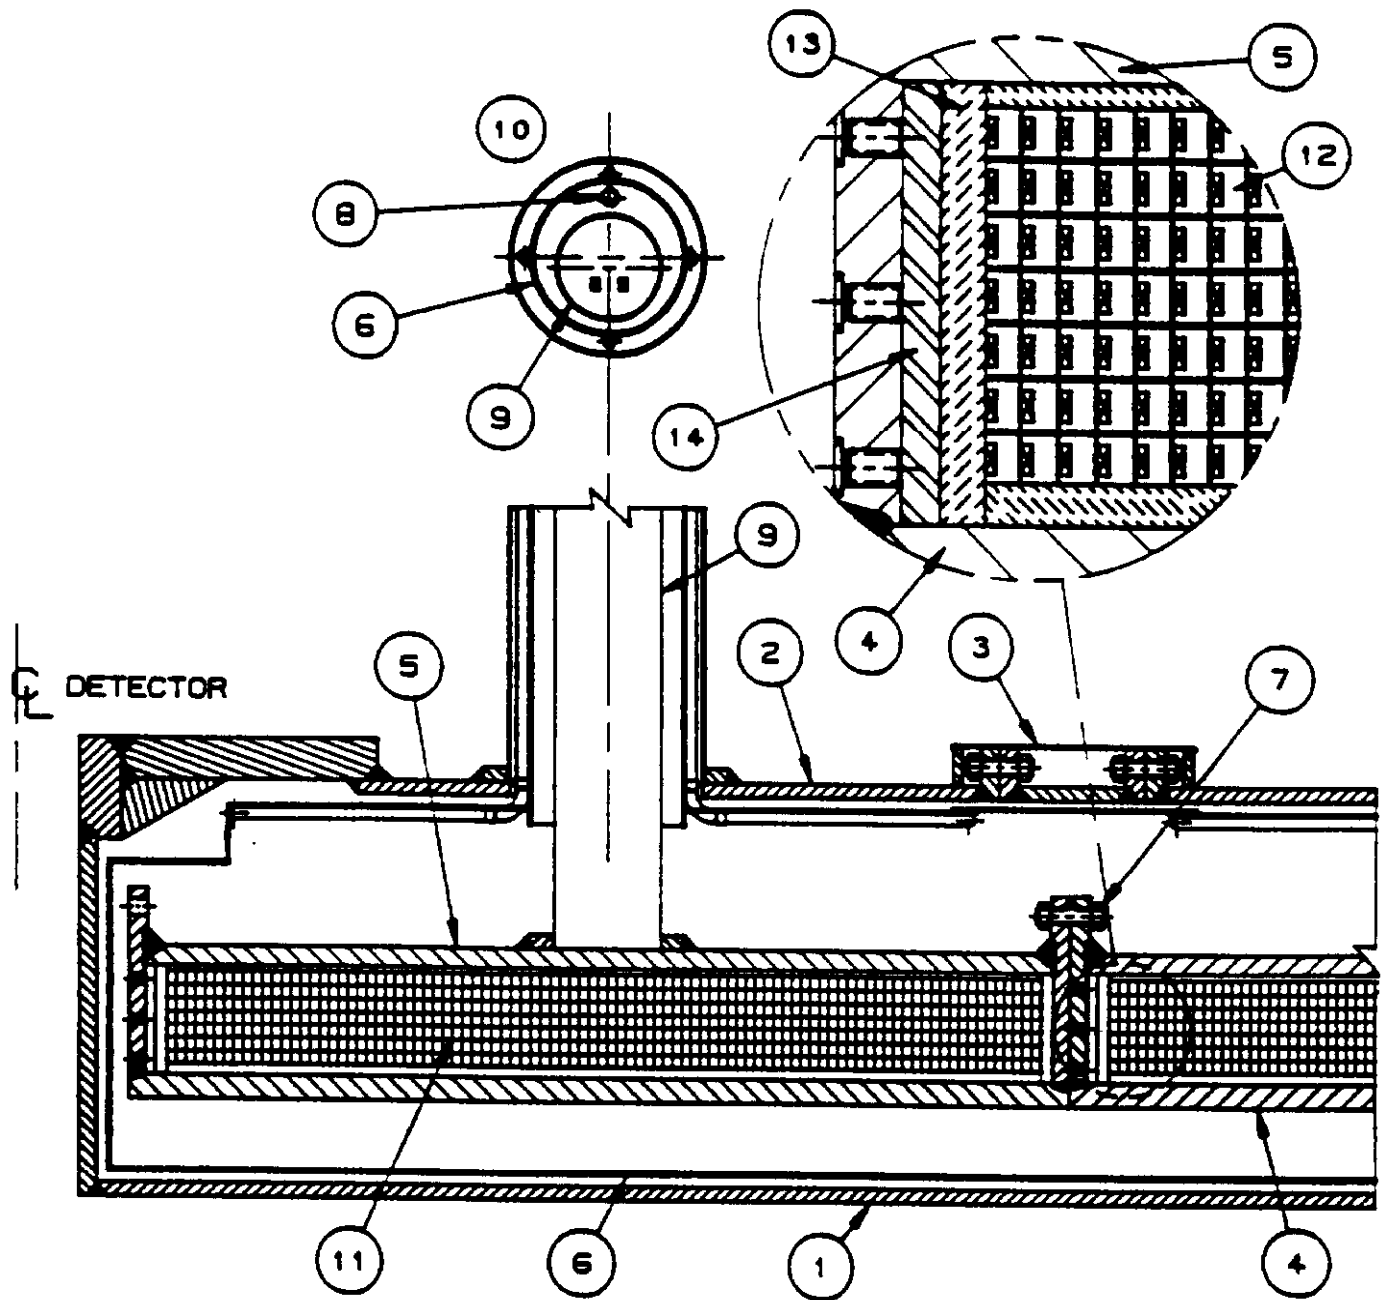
Axial cross section of coil, helium and vacuum vessels: 1, inner and 2, outer vacuum shells; 3, assembly joint (if required); 4, inner and 5, outer helium vessel shell; 6, radiation shield; 7, coil module attachment; 8, liquid helium supply pipe; 9, helium return/vent pipe; 10, chimney to storage dewar; 11, coil winding; 12, conductor; 13, insulation; 14, axial preload bar.
